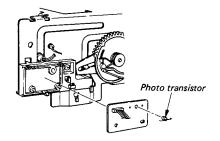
Replacement of photo transistor on FL P.C. board (L)
